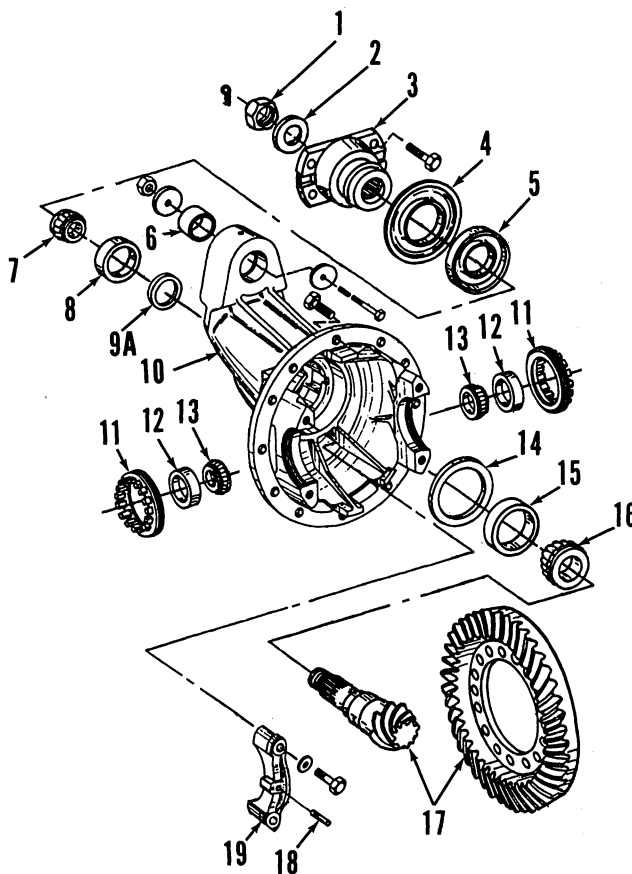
Exploded view of bevel pinion and carrier assembly used on Models 4650 and 4850. Components are similar to those shown in Fig. 29 except for shim washer (9A) and bearing cap (19).
